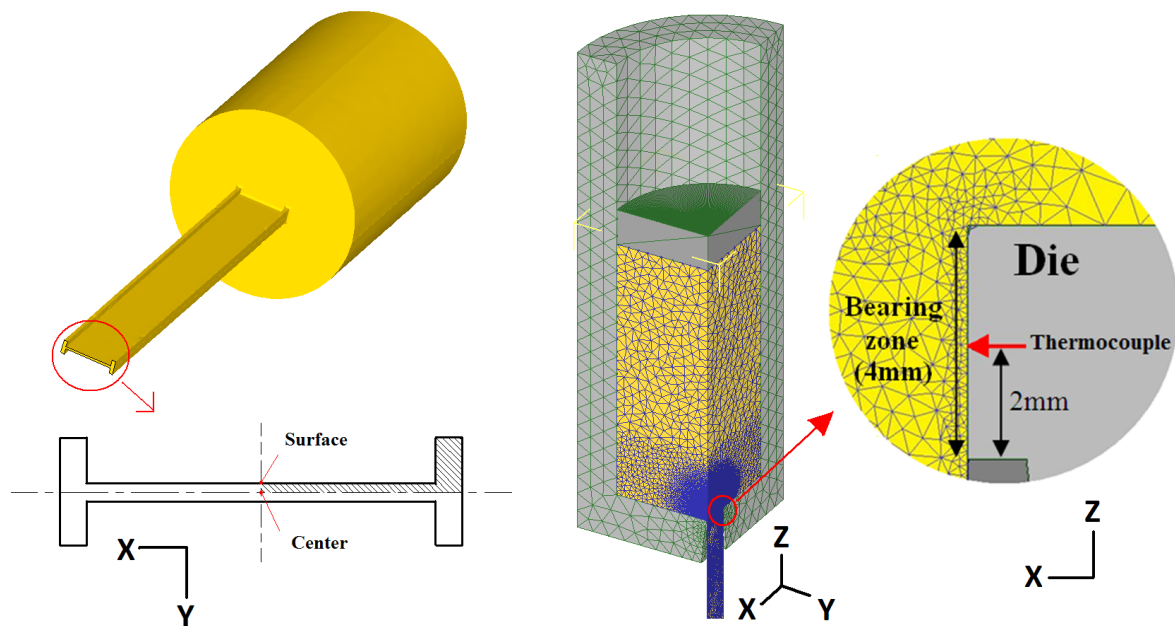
Schematic showing the billet being extruded into an I-beam section showing: Solid model of the billet and I-beam (left) and mesh used in the container, billet and I-beam (right).
